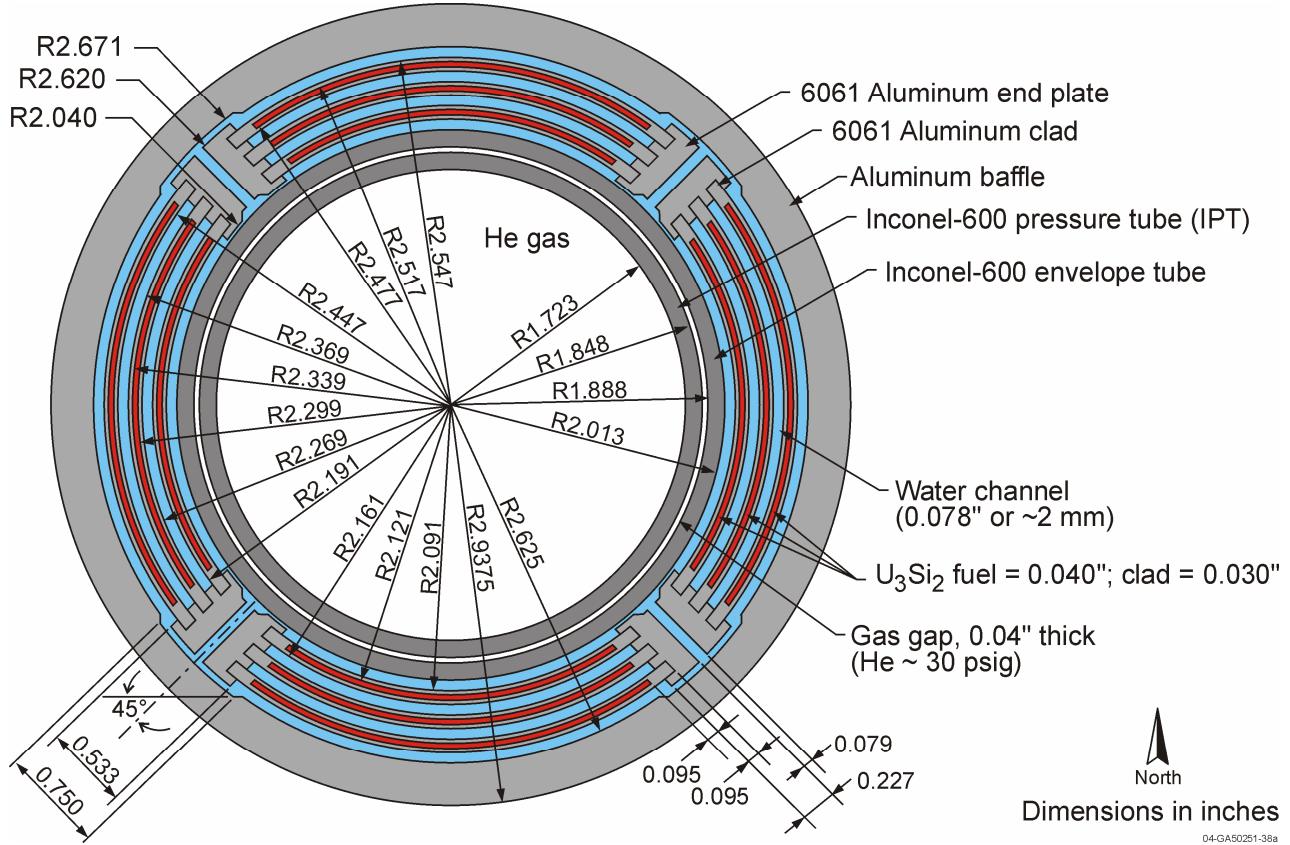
Cross section of GTL booster fuel assembly (dimensions in inches).
